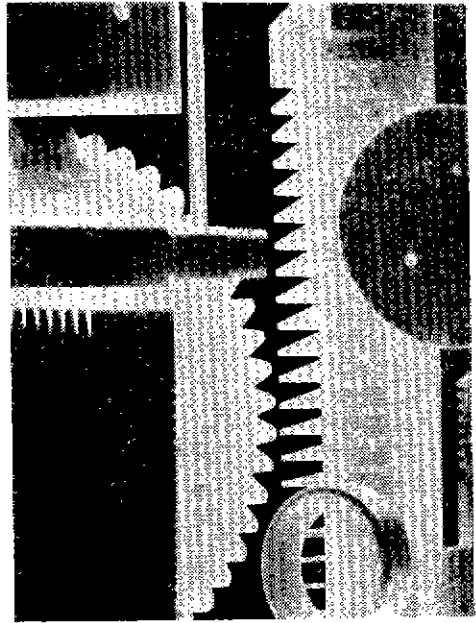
The delicates, screw, gear, etc. made of Macor[®]. Precision is about 0.005''(inch).
